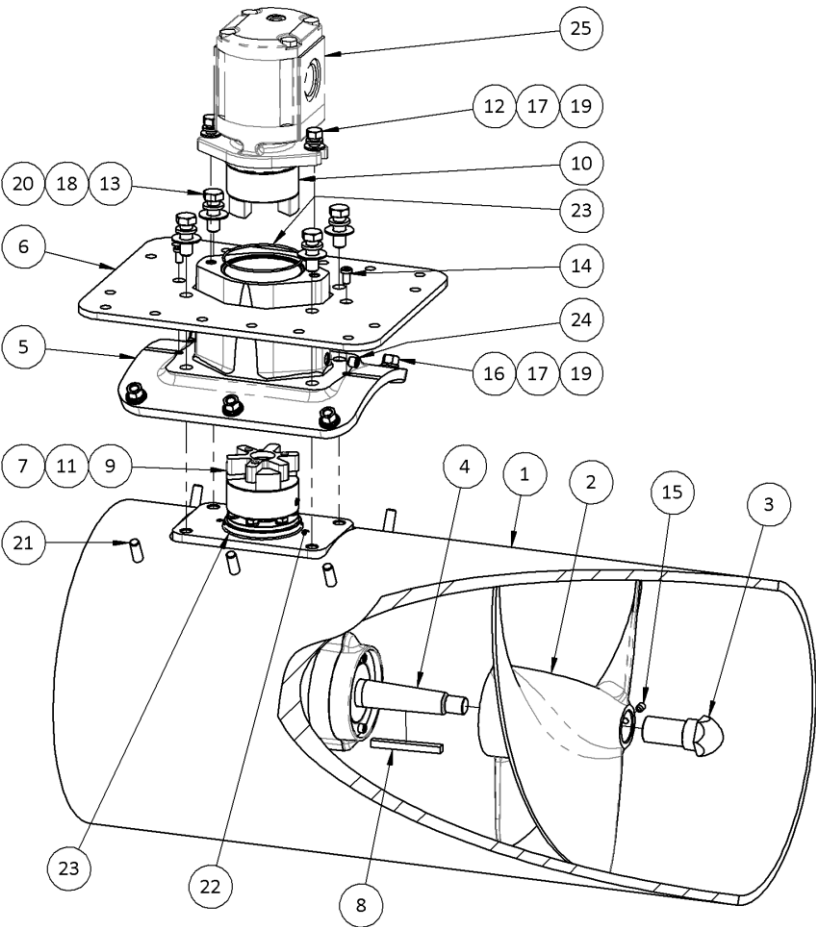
KP16 & KP18 hydraulic bolt-on thrusters' parts list diagram
